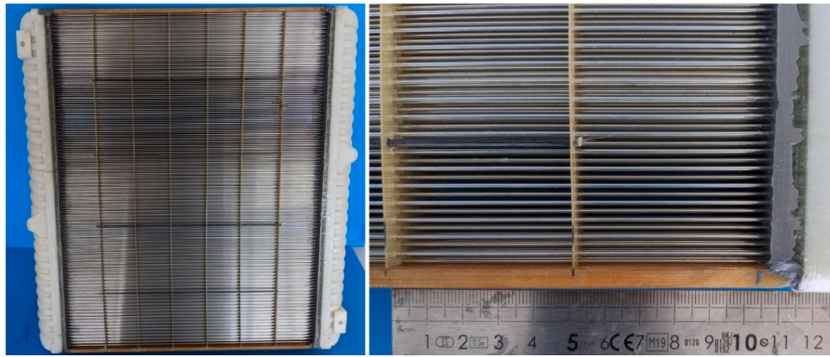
SST: steel tubes, staggered arrangement, cross-section 470x360 mm.
